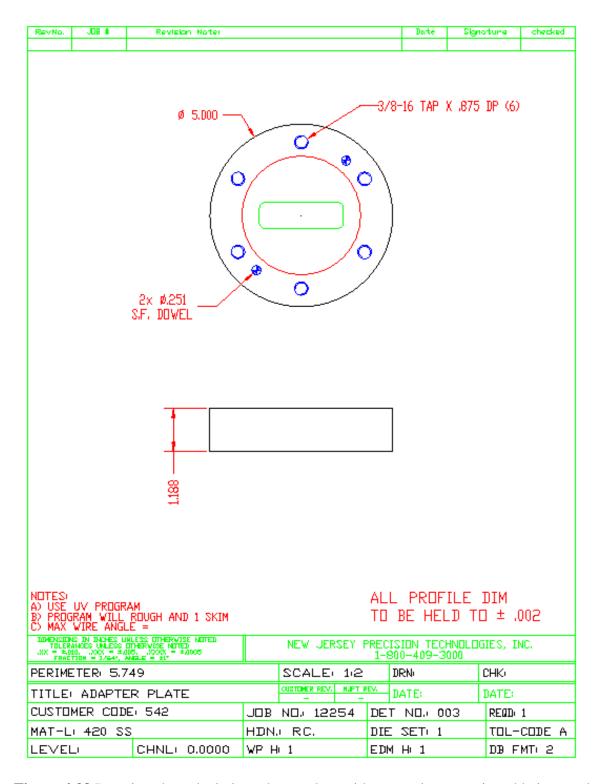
Drawing sheet depicting adapter plate with proper layers assigned being used at NJPT.
